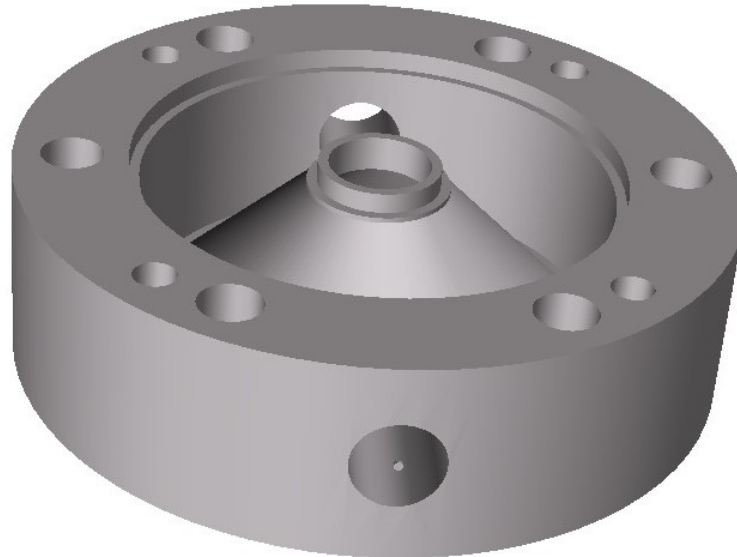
3D image of the LN_2 cooled sample holder, rear view. The coolant flows only below the conical region, entering and exiting from the lateral side. The chamber is closed by a soldered copper disk.
